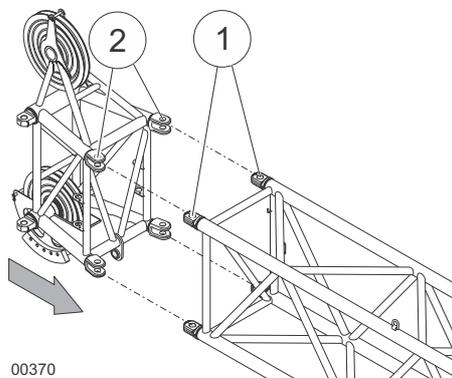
Lifting the lattice boom headpiece to the lattice boom section
